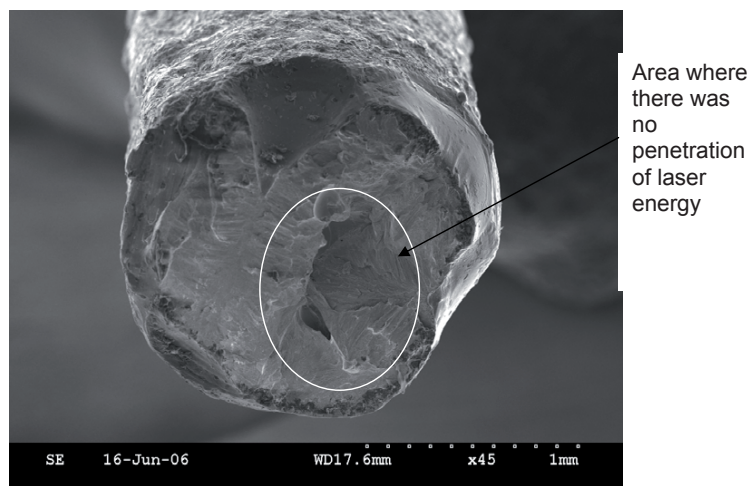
Welded specimen at fracture side (Mag. x45) N.B. the non uniform outline due to deformation of the welding process. Areas of fracture site where welding was incomplete.
